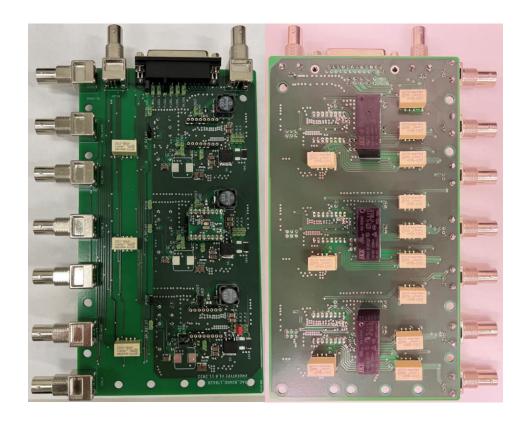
Top-side (left) and bottom-side (right) of the LT8610 test board
